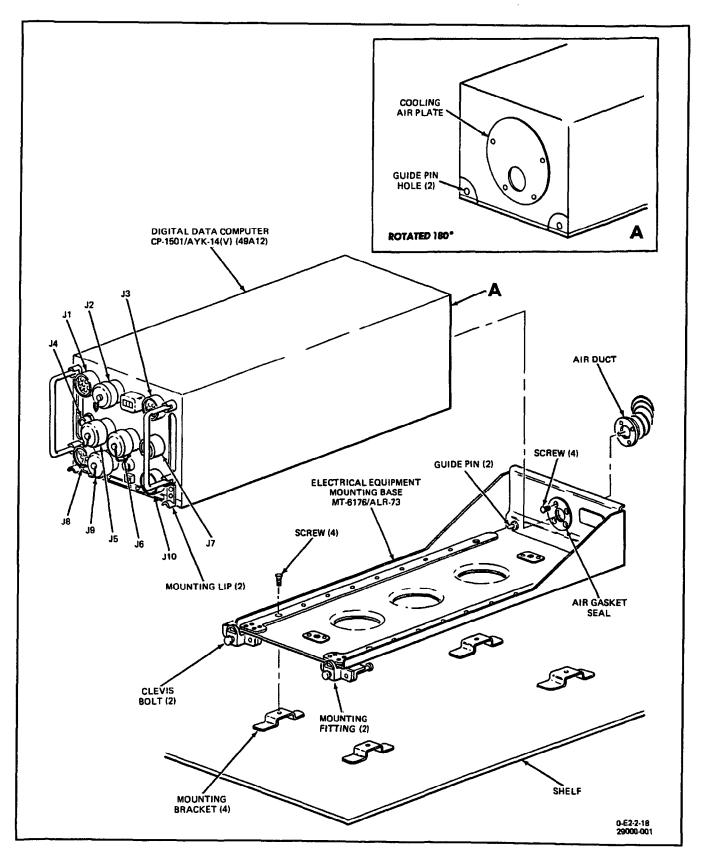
Removal and Installation of Digital Data Computer CP-1501/AYK-14(V) and Electrical Equipment Mounting Base MT-6176/ALR-73
